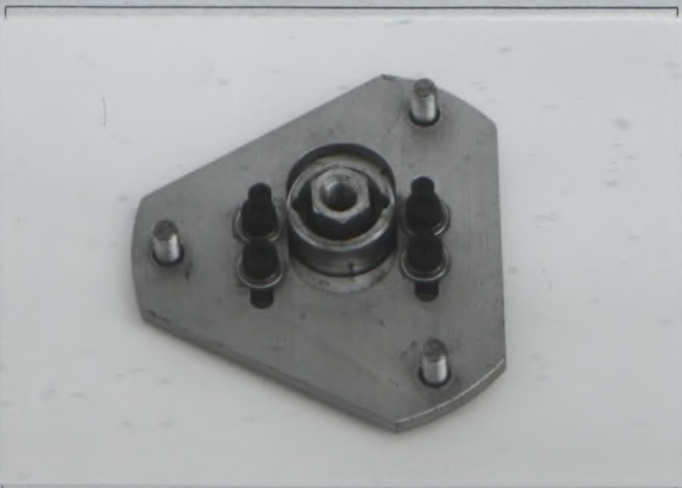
REINFORCED TOP MOUNT, TYPE B
